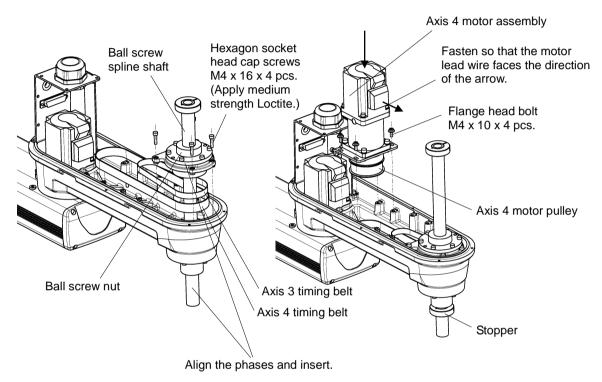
Ball screw and axis 4 motor assembly (KHL-500, KHL-600, KHL-700)
